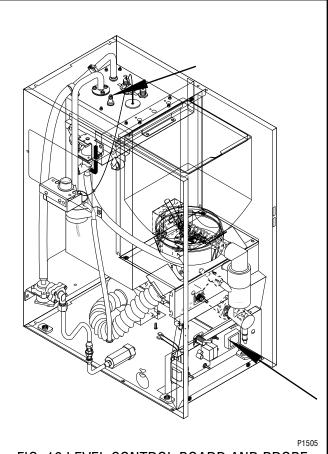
LEVEL CONTROL BOARD AND PROBE
